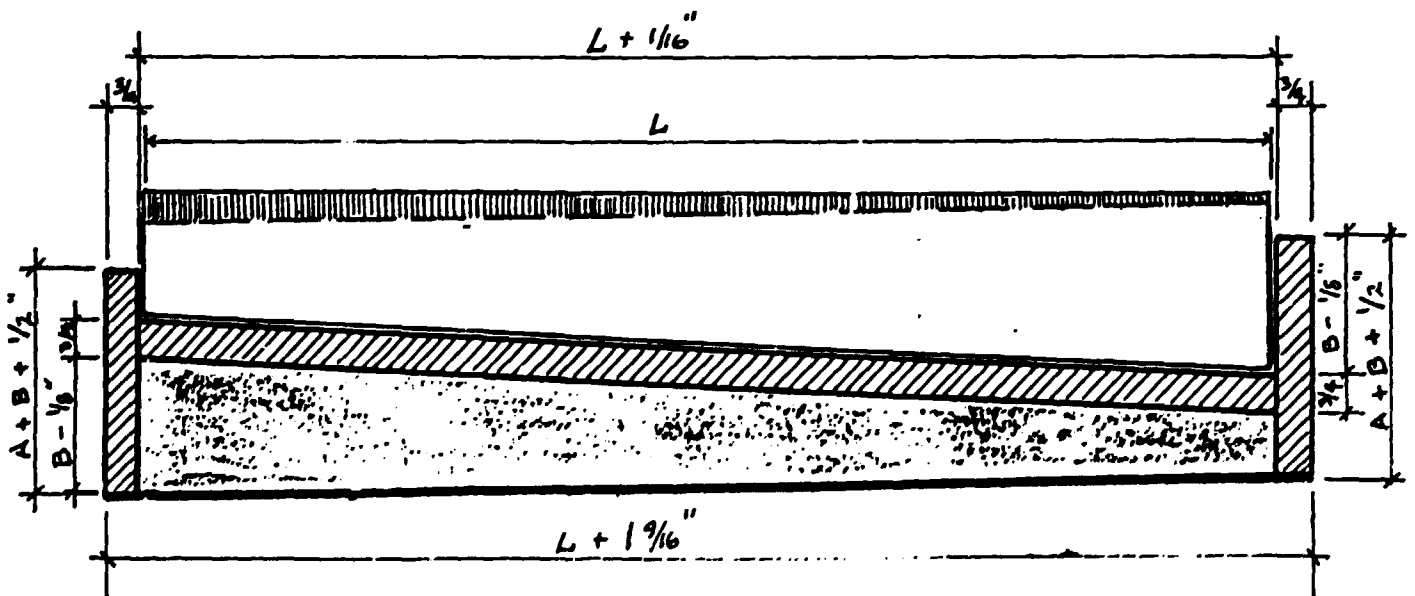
Cross-section S-S', BOX-PLANING JIG No.2
